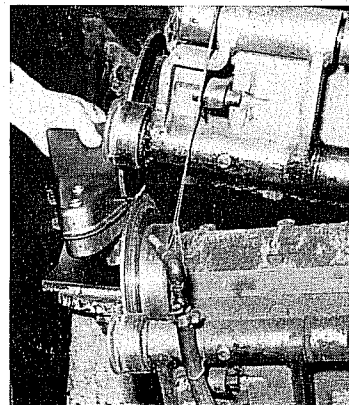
Roller seam welding two halves of rear engine-mounting bracket
